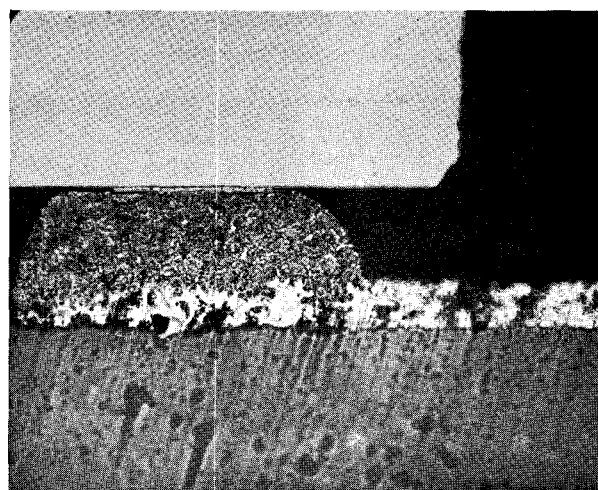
Enlarged view of a single solder interconnection showing a glass dam which restricts solder wetting to electrode tip (375X).
